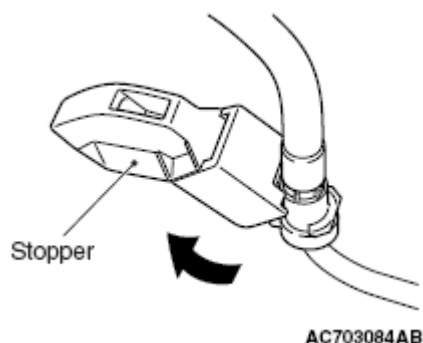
Removing Stopper Of Fuel High-Pressure Hose
